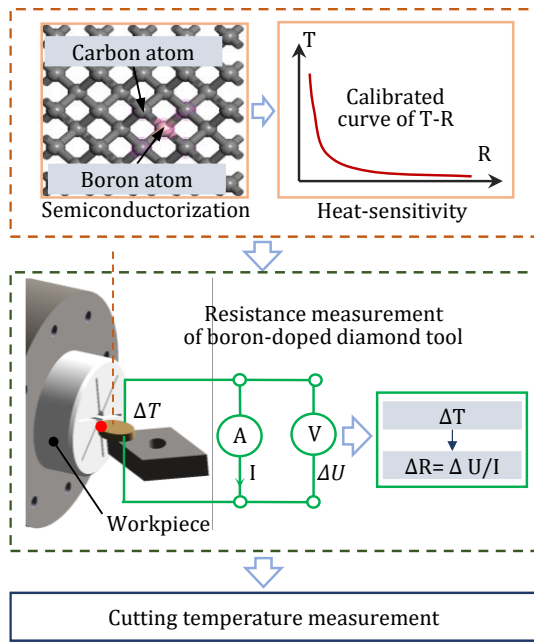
Principle of cutting temperature measurement using the boron-doped diamond tool
